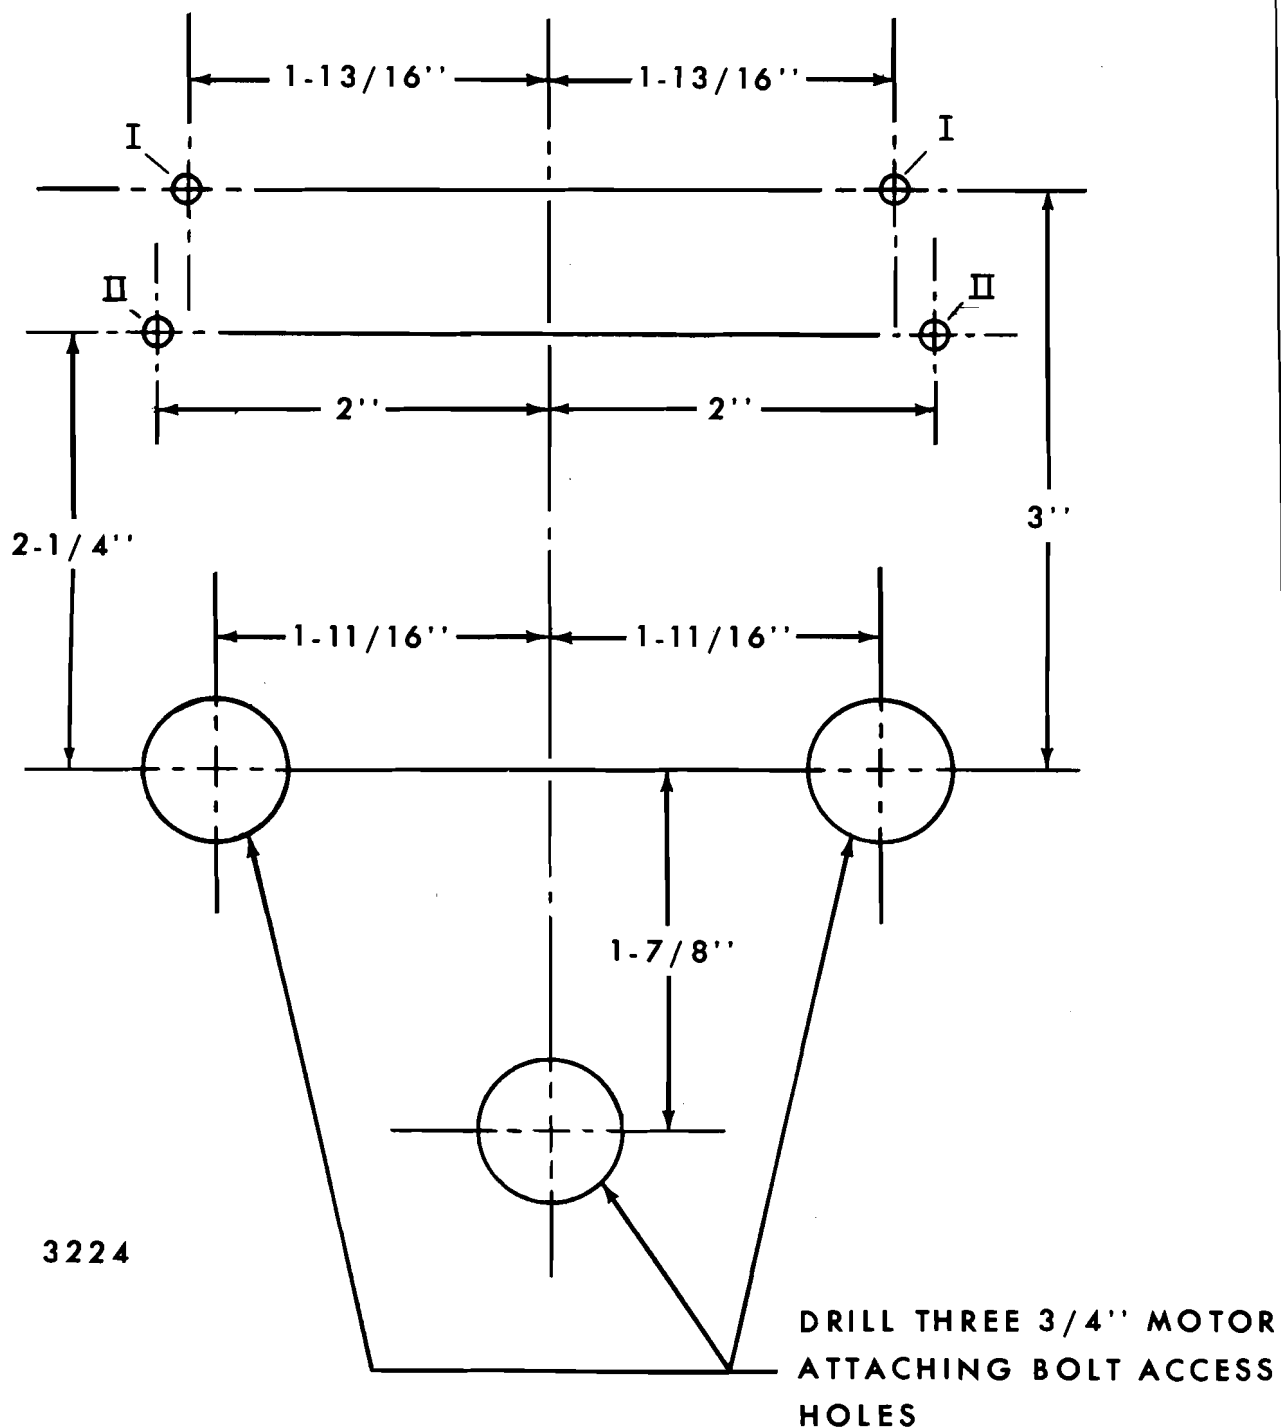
Window Regulator Lower Attaching Bolt Reference Points for Locating Window Motor to Regulator Attaching Bolts: "I" for "A-35, 45, 39 and 69" Style Rear Doors; "II" for "A-37, 67 and 87" and "G-57" Style Front Doors
